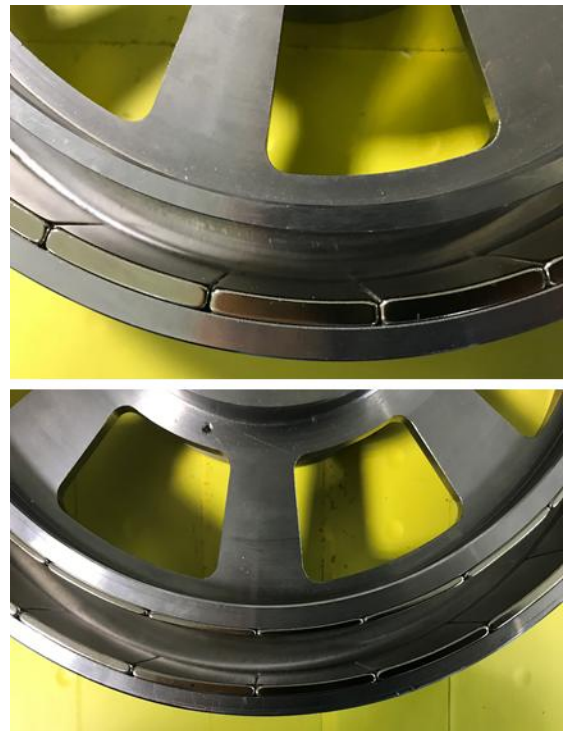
Prototype Motor Wheel (5T & 3T2T Magnet)
